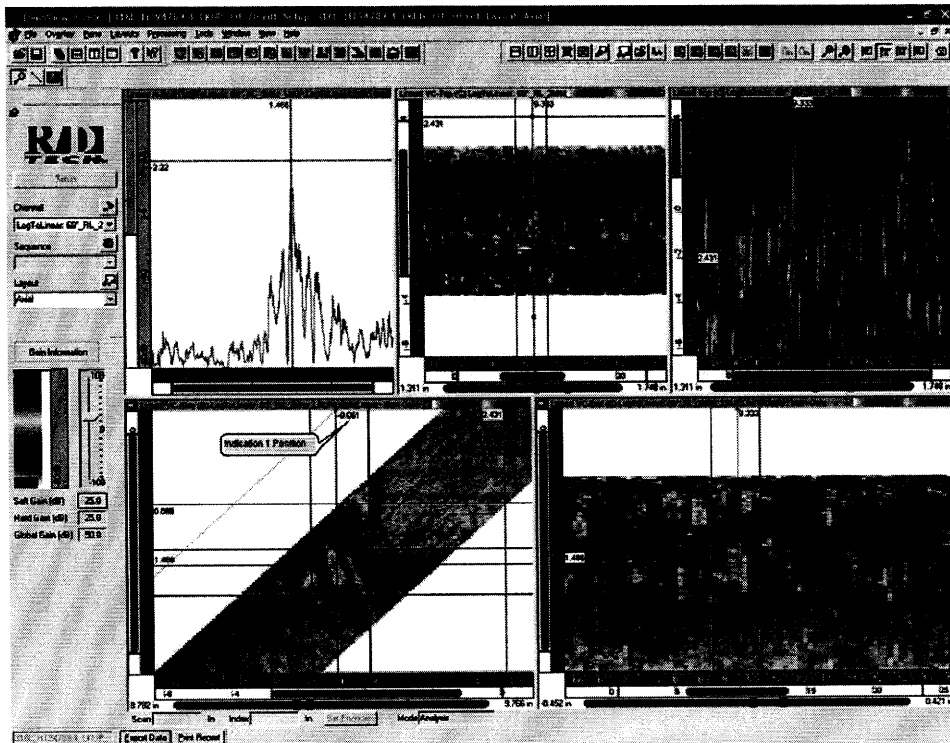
Indication 1 Position: -0.051" from Weld Centerline
